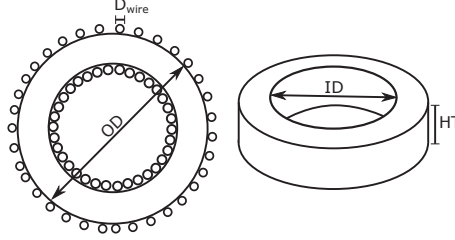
Specification of core dimension used for calculating the volume of the inductor.
